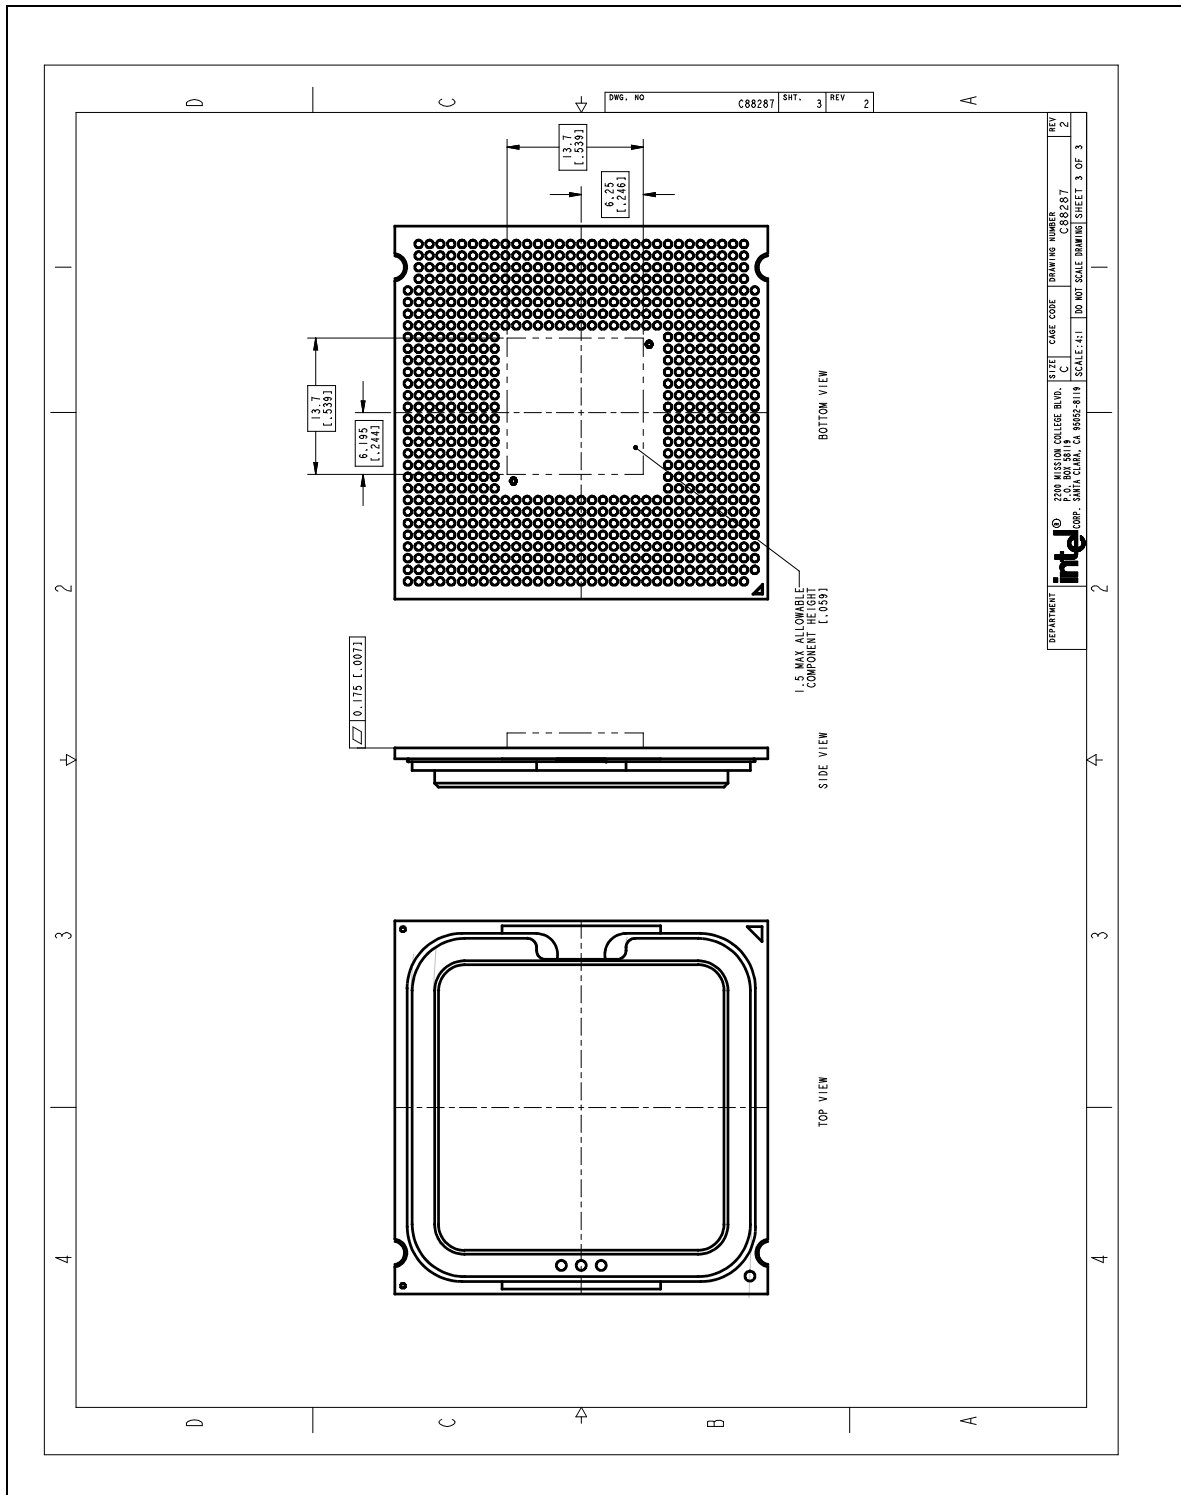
Processor Package Drawing (Sheet 3 of 3)
